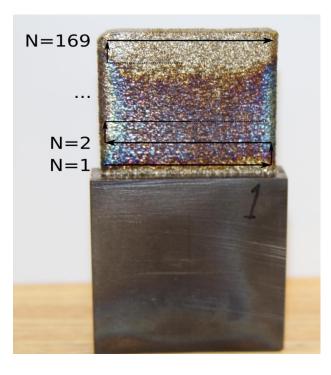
Ti-6Al-4V thin wall deposited with 375 MMPM setting of laser with zig-zag build scheme. Deposition started at the lower left corner. Five specimens were tested from each of such wall
